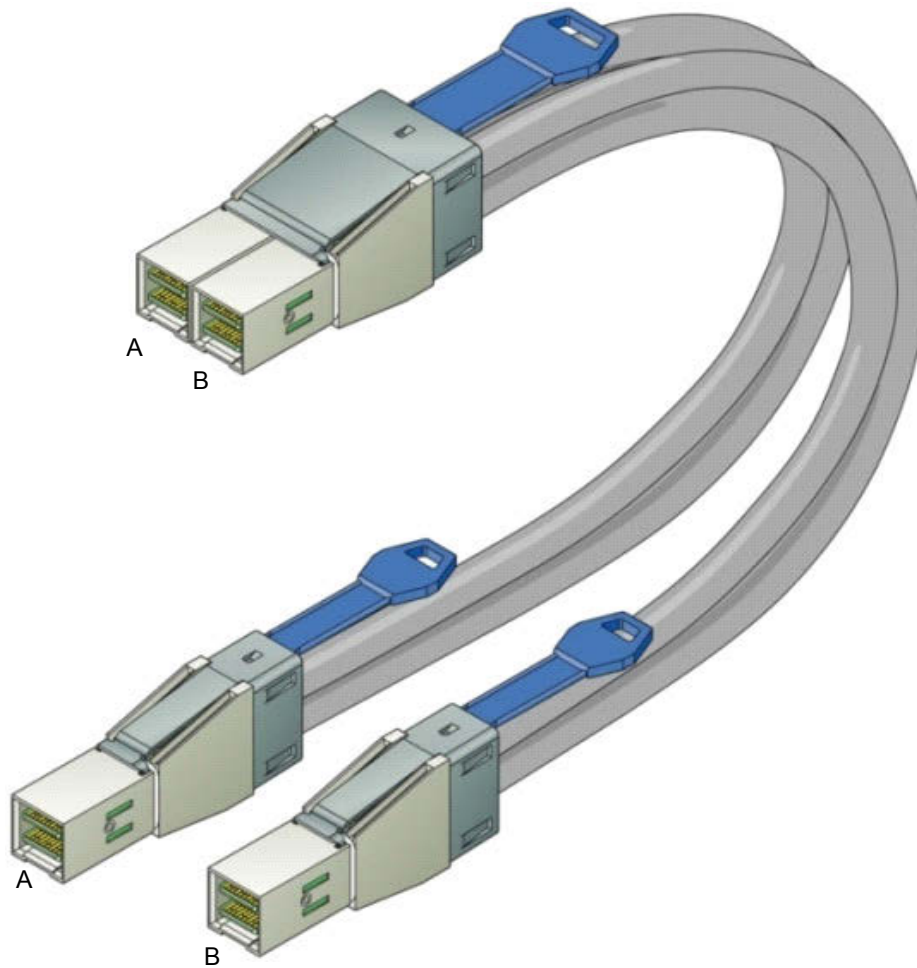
SAS external cable assembly with a Mini SAS HD 8x cable plug connector and two Mini SAS HD 4x cable plug connectors
